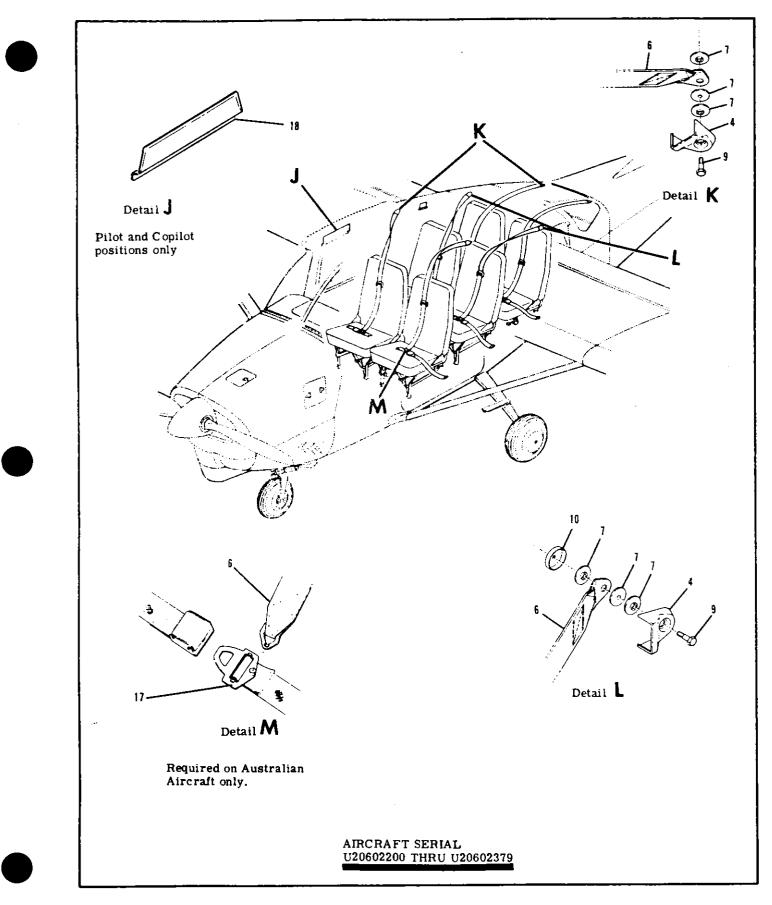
Seat Belt and Shoulder Harness Installation (Sheet 2 of 3)
